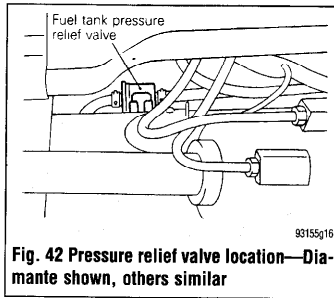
Pressure relief valve location—Diamante shown, others similar
